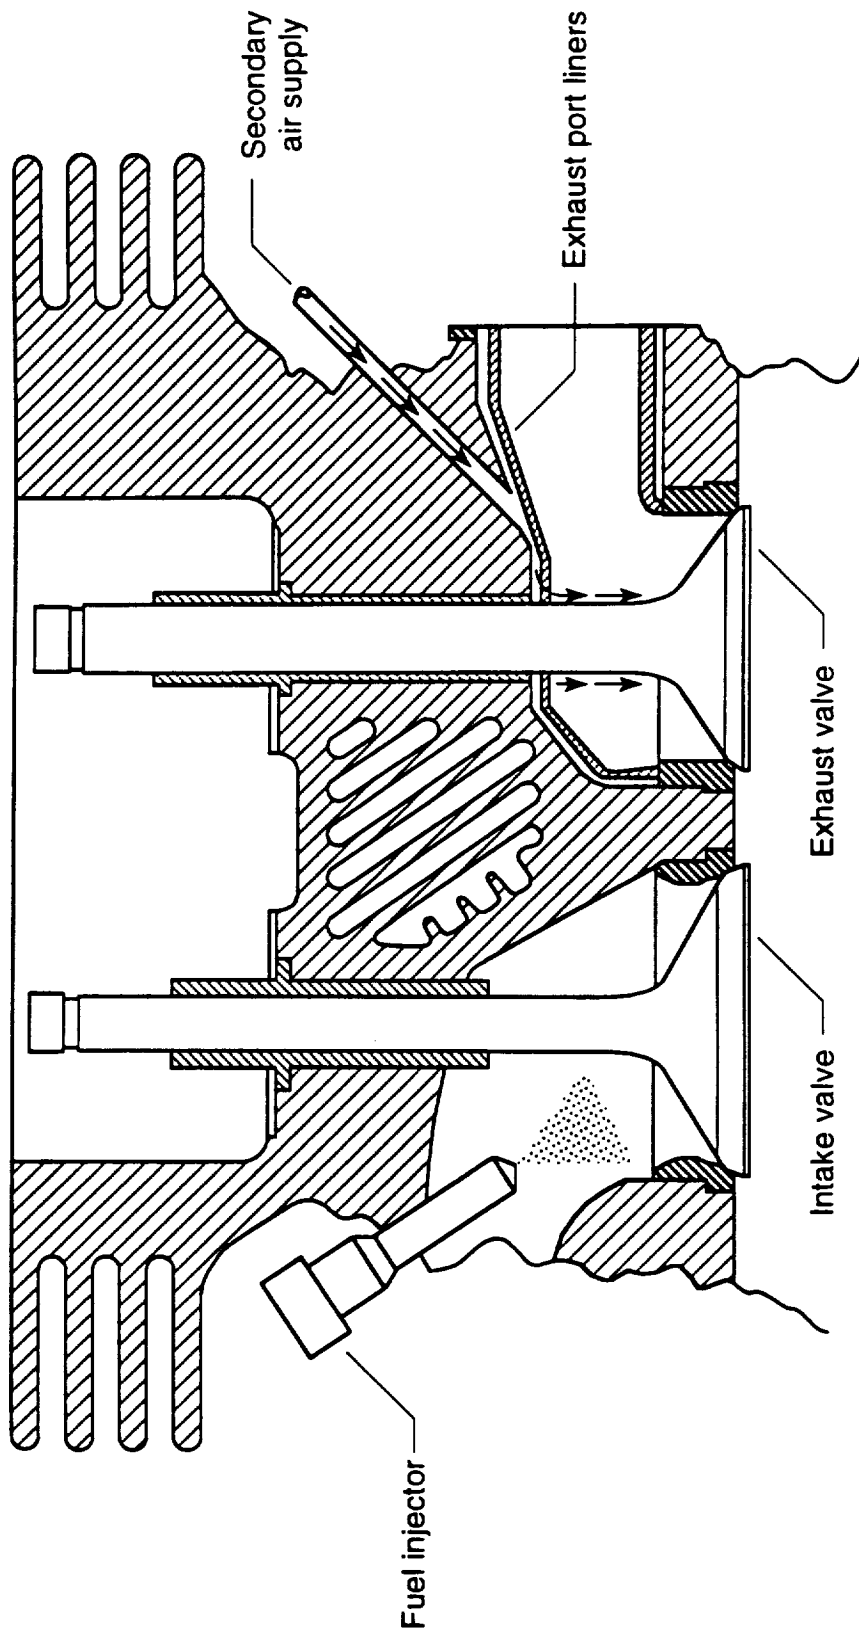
Cutaway sketch of a typical cylinder incorporating exhaust port liners and secondary air injection.
